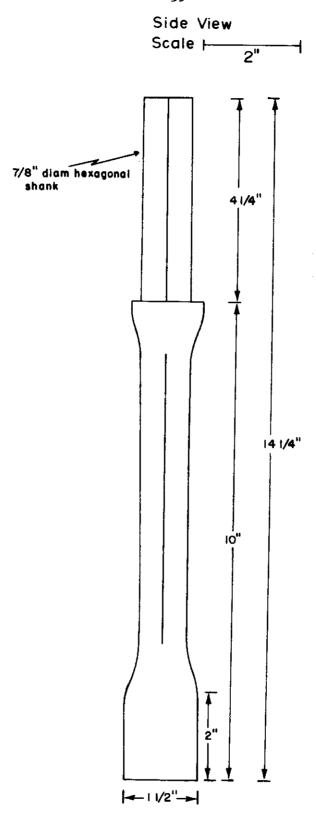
Driving piece for pneumatic impact hammer, side view.
